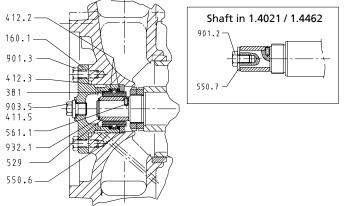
Dismantling the plain bearing - radial suction nozzle
